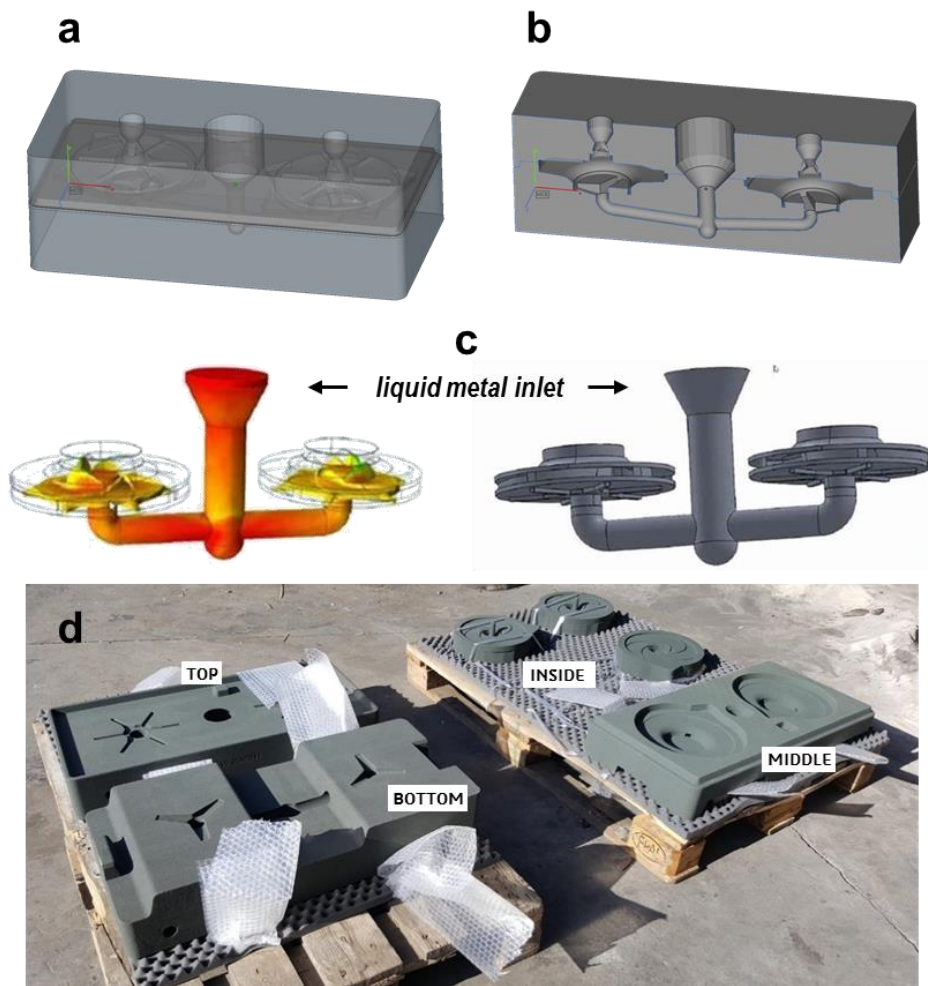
(a) Transparent and (b) cross-section 3D views of the sand moulds. (c) Model views of the impeller fills at the initial (left) and final (right) moments. (d) Photographs of the manufactured 3D sand moulds indicating the different parts.
